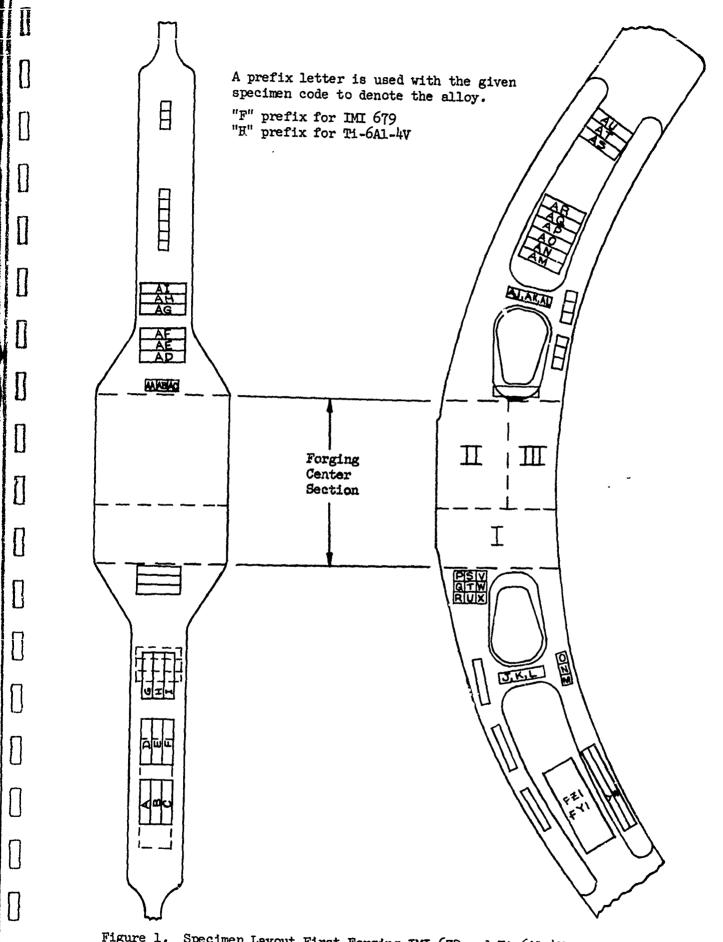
Specimen Layout First Forging IMI 679 and Ti-6Al-4V
